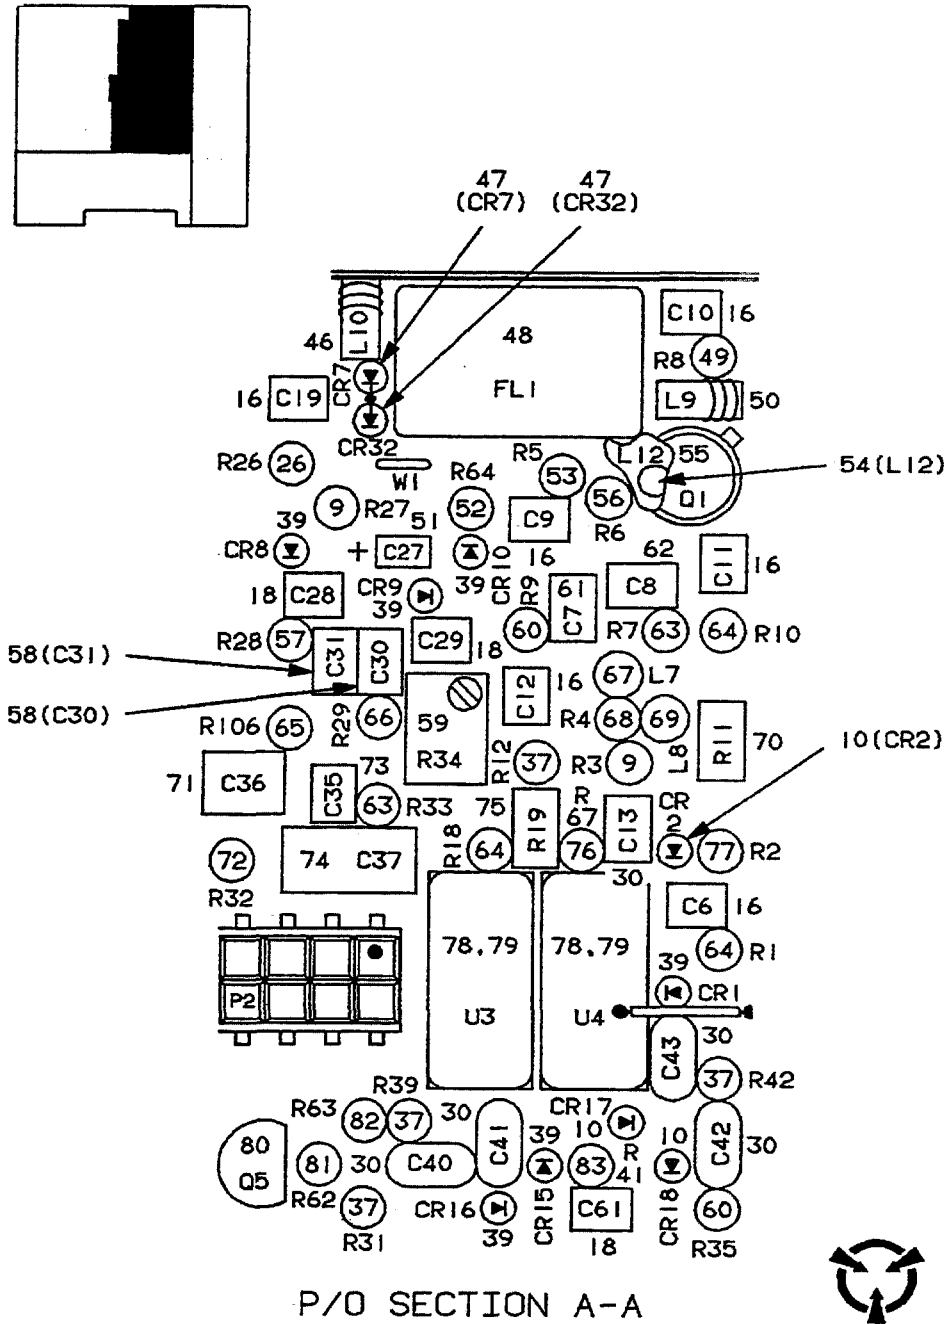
High Band RF/IF Module Assembly (Sheet 3 of 6)
